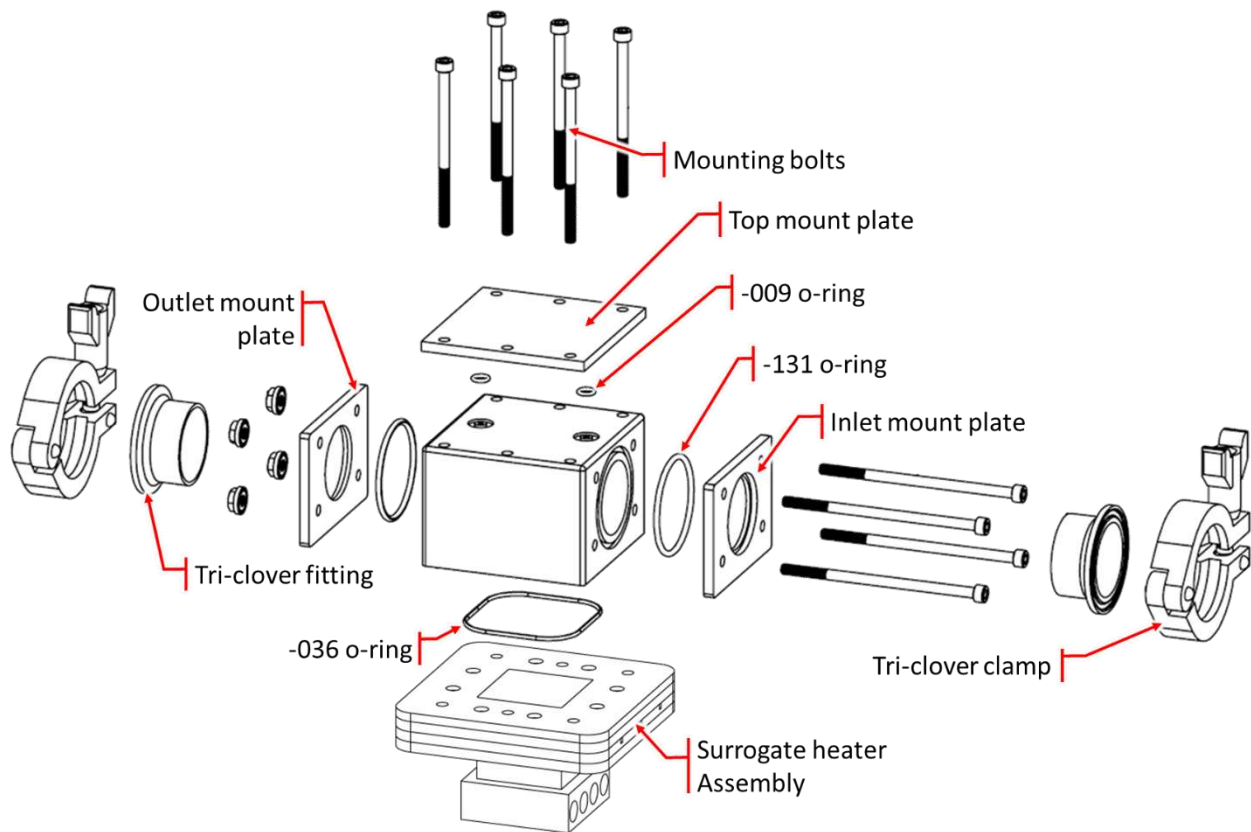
Exploded view of surrogate heater and impingement cooler assembly
